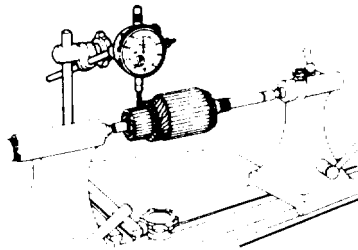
Inspecting Commutator for Out-of-Roundness
